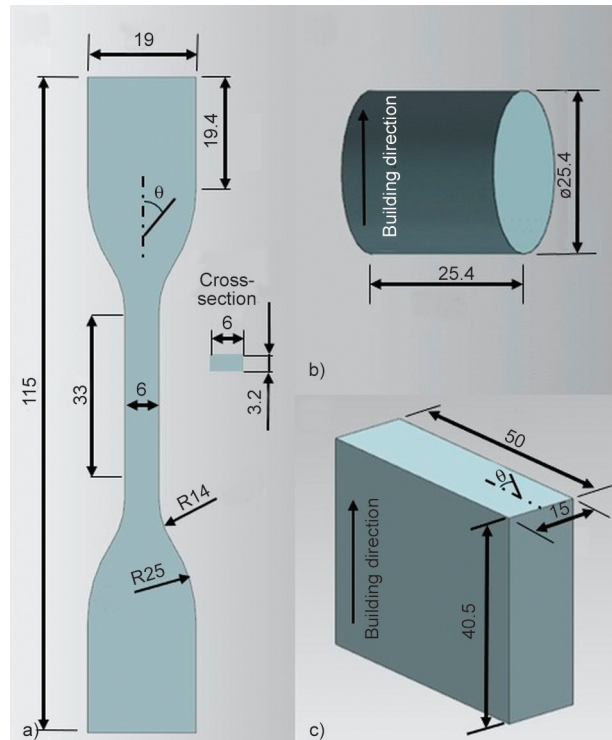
Schematic views of the specimen geometries. a) Tensile specimen. b) Compression specimen. c) Rectangular slab specimen with graded properties for Shore hardness measurements. All dimensions are in mm.
